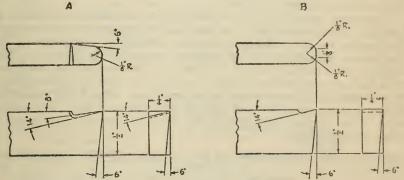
Dimensions and forms of the tools used in the lathe tests
